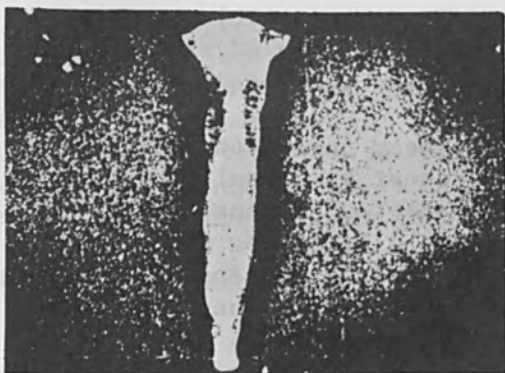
Laser butt weld in 302 stainless steel 0.5 in. thick; laser power about 3.5 kW, weld speed 50 in./min, mirror focal length 10 in., depth-to-width ratio about 7.
